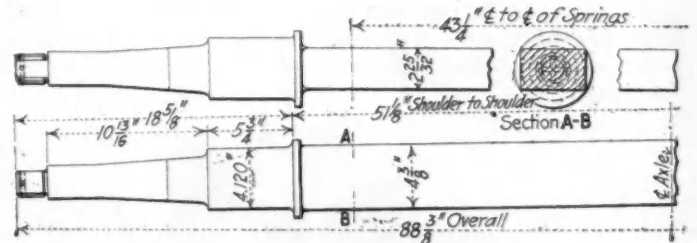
DETAIL OF THE RECTANGULAR REAR-AXLE OF A 5-TON CHAIN-DRIVEN TRUCK
